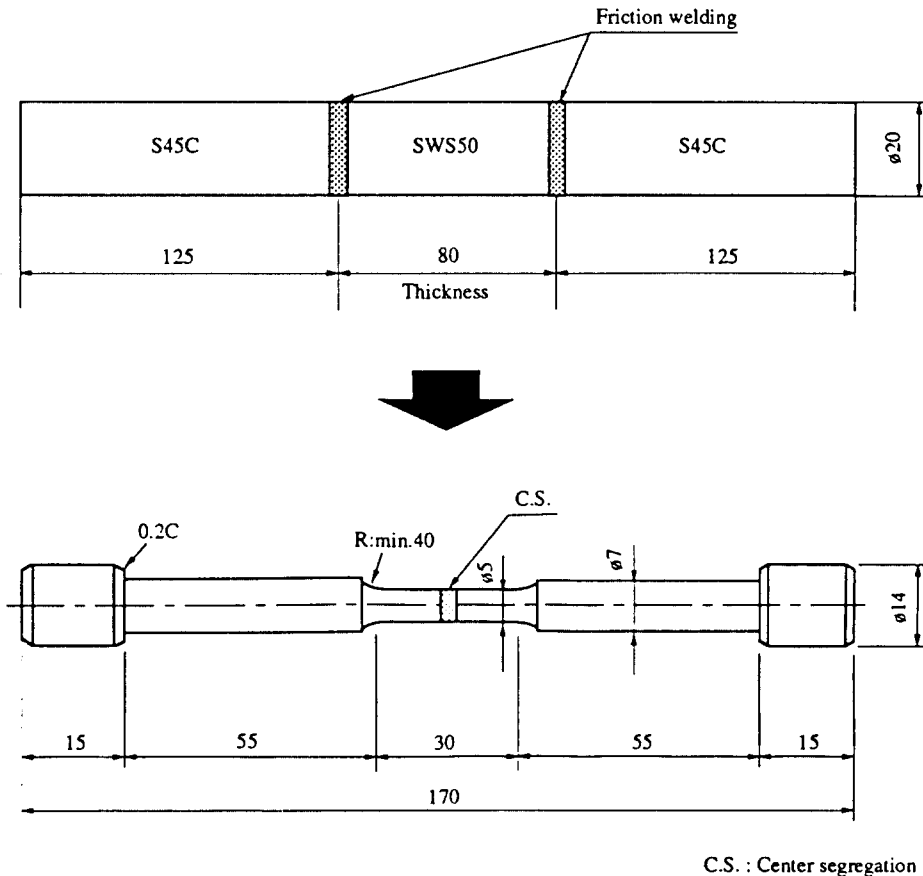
Shape and dimension of specimen for synthetic HAZ cold cracking test
